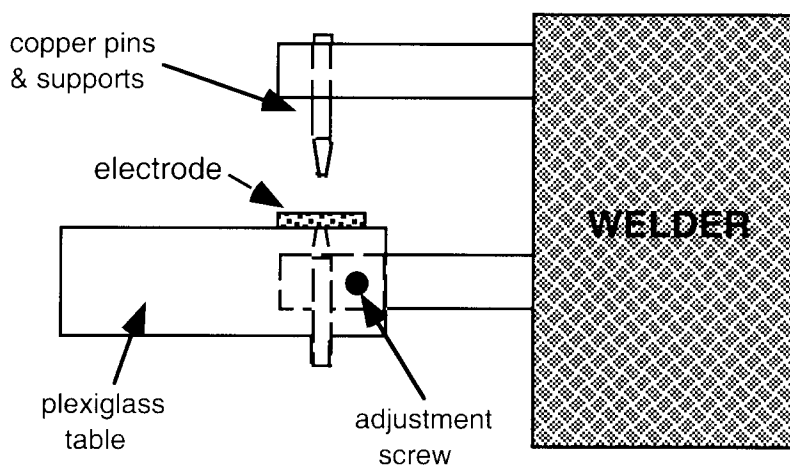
This figure is a simple model of the weld table that was built to weld on the PMP2 electrode. The pin from the bottom is embedded in the table with a setscrew from the other side. It can also be adjusted for height so that the pin just touches the platinum which is approximately 100 microns from the surface of the table due to the lamination. This weld process should be able to weld on any future electrodes created because of its adjustability.
